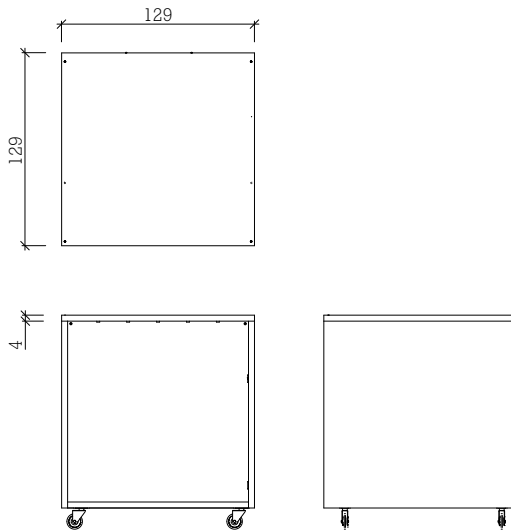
Construction detail - Supporting structure of the display unit | Floor plan and dimensioned elevations.
